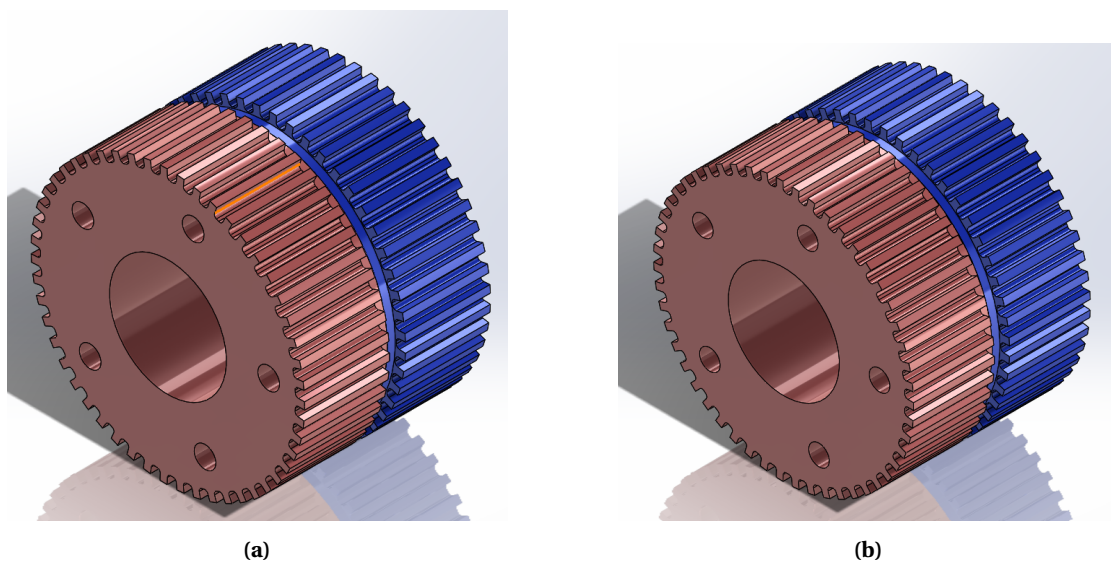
(A) 3D model of the 50-tooth rotor (B) 3D model of the 51-tooth rotor
